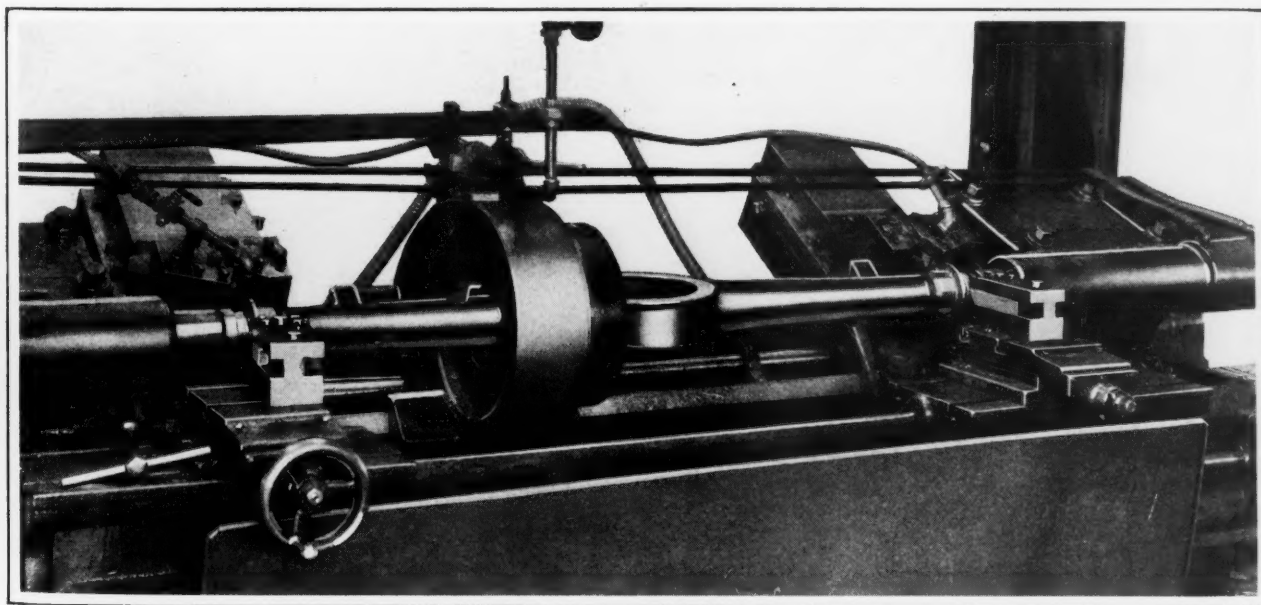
Double-end Turning Lathe Used in Finishing Various Outside Surfaces of the Housing Ends
